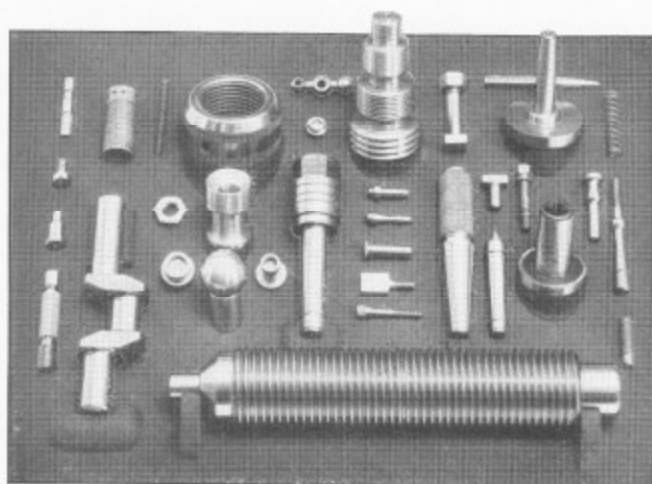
Metal Parts Machined Entirely on a 9-inch Swing Back-Geared Screw Cutting Metal Working Lathe.
